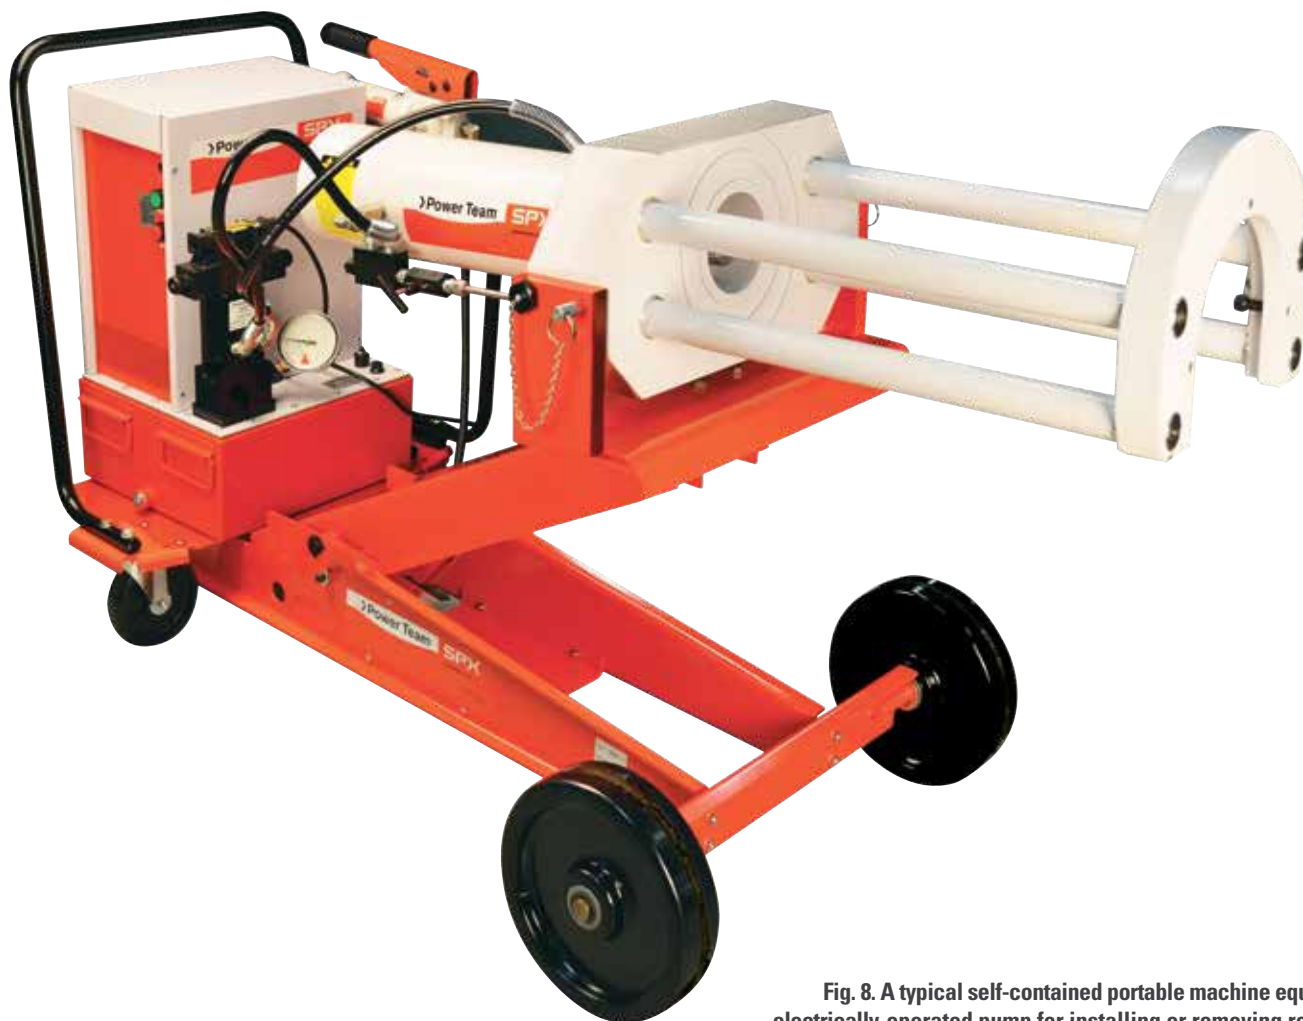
A typical self-contained portable machine equipped with an electrically-operated pump for installing or removing roller bearings.
